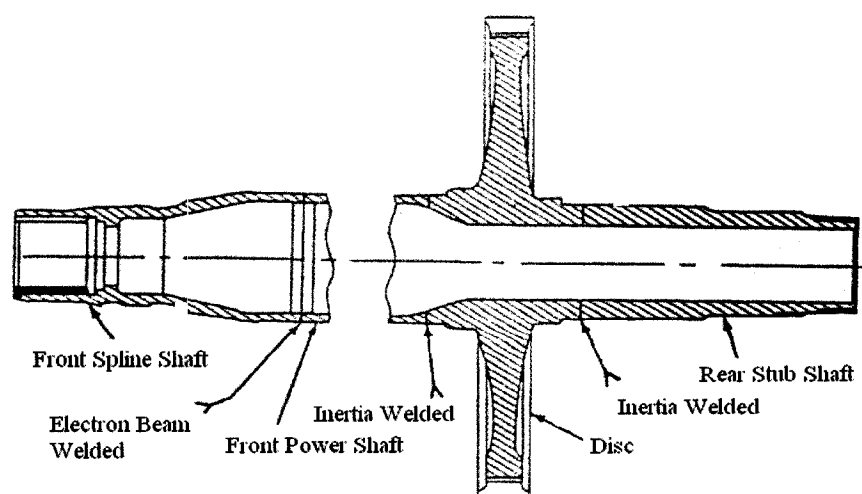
Shaft assembly. J.A. Miller and J.J. O'Connor (1980) [1]
